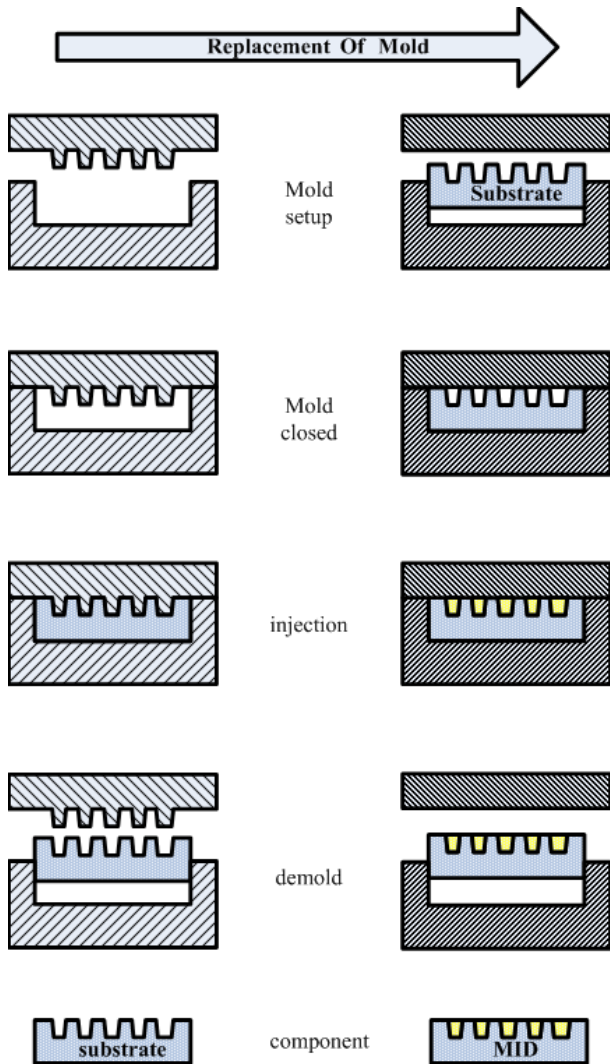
FABRICATION STEPS OF THE TWO COMPONENT INJECTION MOLDING PROCESS FOR MID
